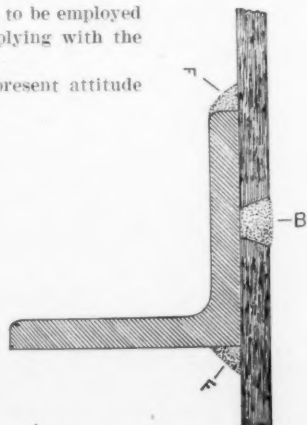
SIDE AND OVERHEAD WELDS
